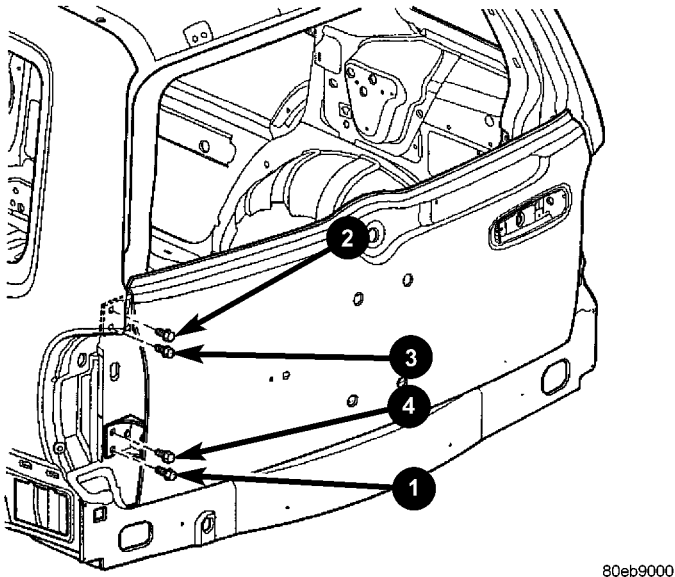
HINGE FASTENERS/OUTER TORQUE SEQUENCE
